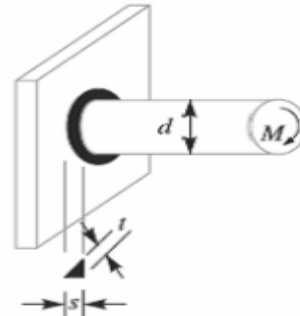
Circular fillet weld subjected to Bending moment.
